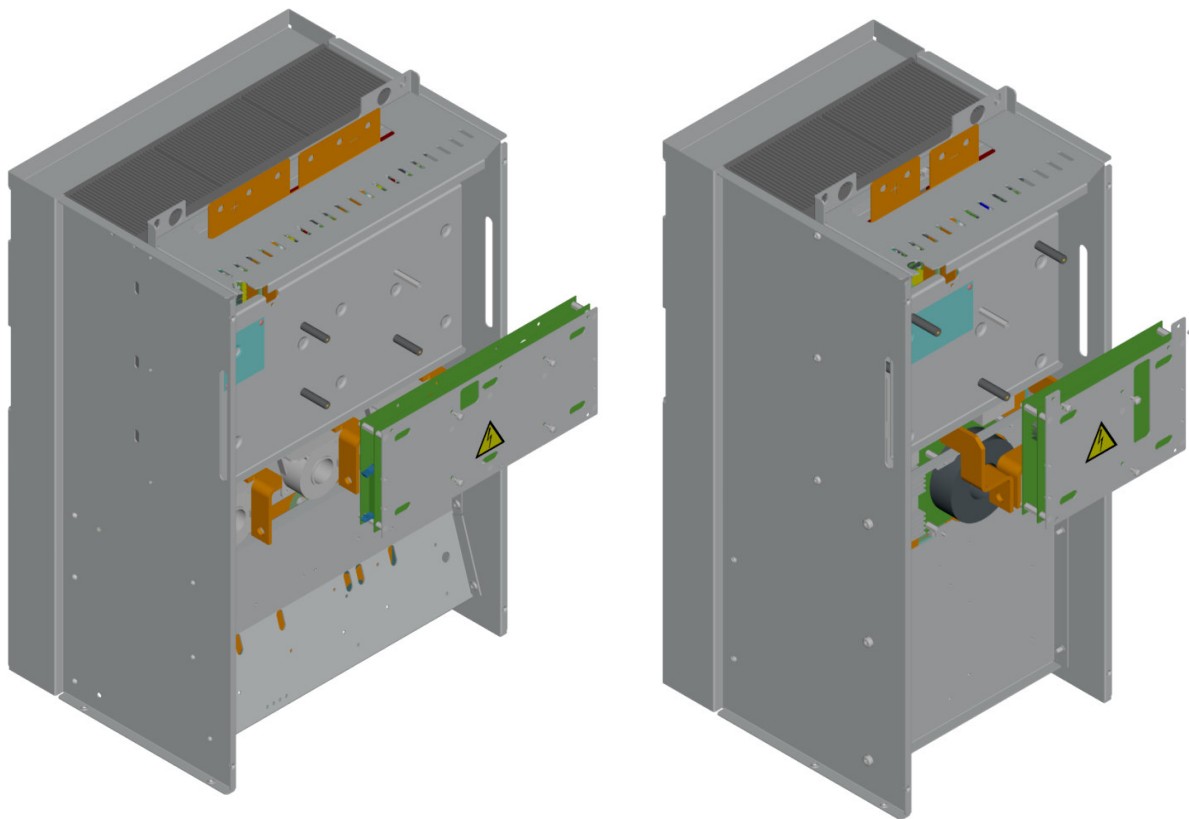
Remove 4 pcs M4x8 and the control pcb assembly
